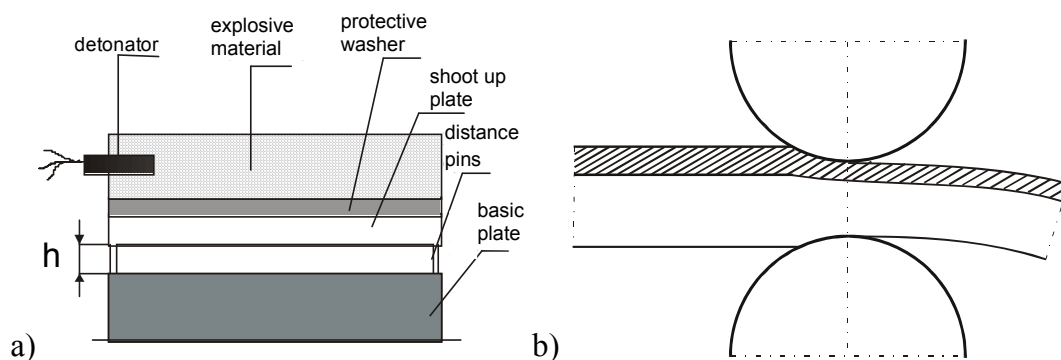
Stages of production of bimetallic plates, a) combining by the method of explosive welding, b) scheme of asymmetrical rolling of bimetallic plates [7-9]
